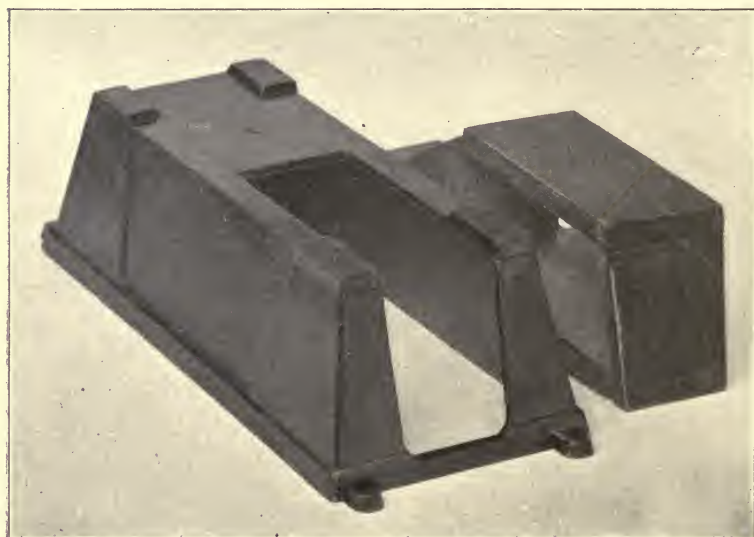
BED PLATE PATTERN WITH SUPPORT REMOVED.
